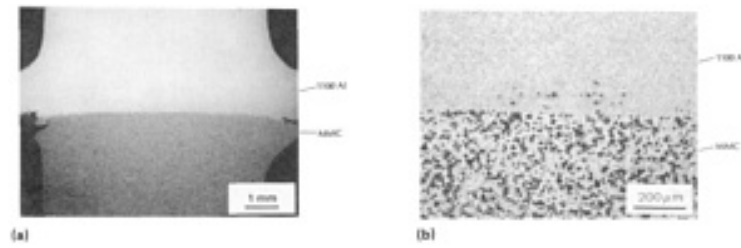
CROSS SECTION OF THE INTERFACE OF A DIRECT-DRIVE FRICTION WELD JOINING 1100 ALUMINUM TO A 2024 ALUMINUM ALLOY WITH 15 VOL% Al_2O_3 PARTICLES. (B) HIGHER MAGNIFICATION OF THE SAME WELD SHOWING THE EXCELLENT WELD FORMED AT THE INTERFACE
